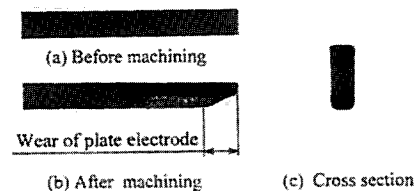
Wear of straight plate electrode (Machining depth: 3mm)
